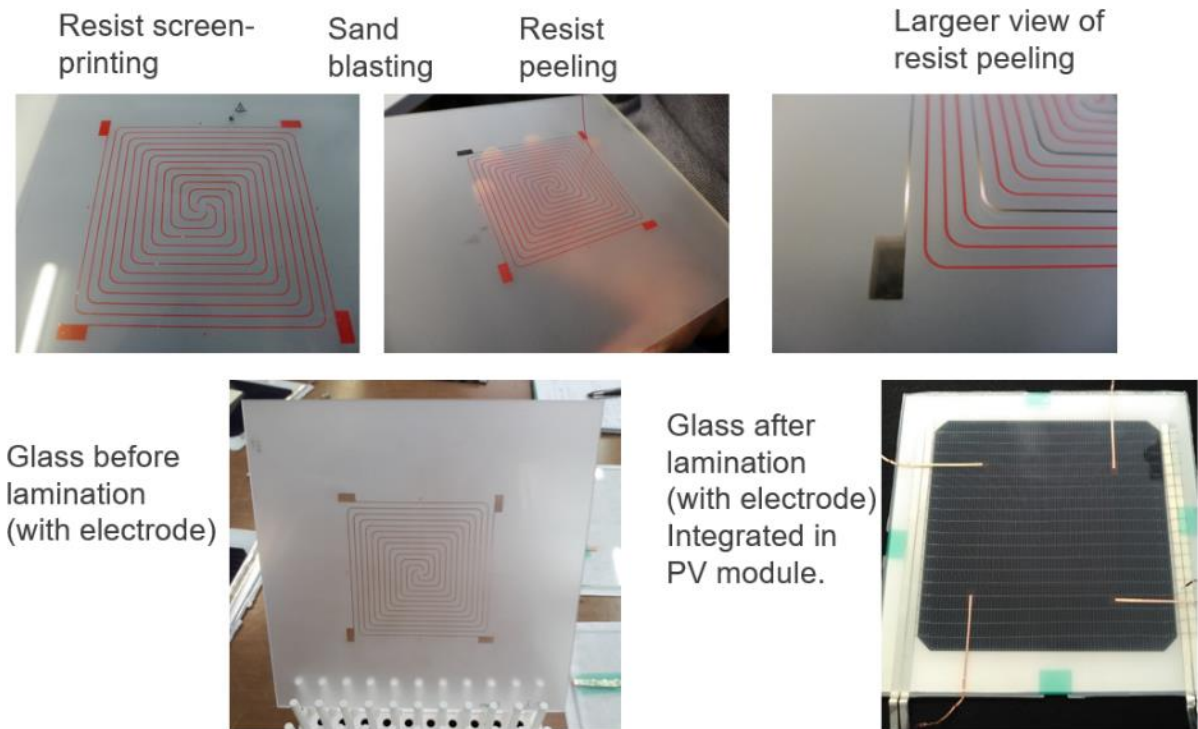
Pictures of the process of spiral design fabrication using sand-blasting.
